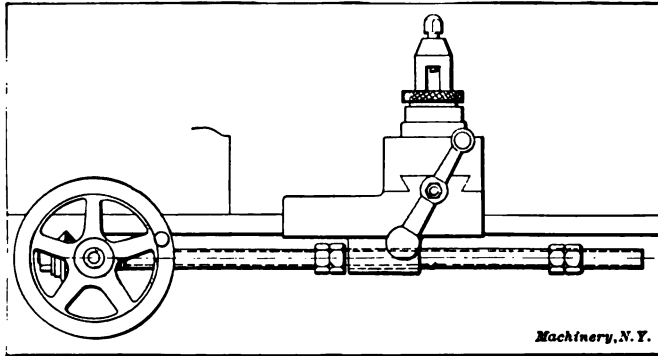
Stop-rod passing through a Hole in a Turret Lath Cross-slide
